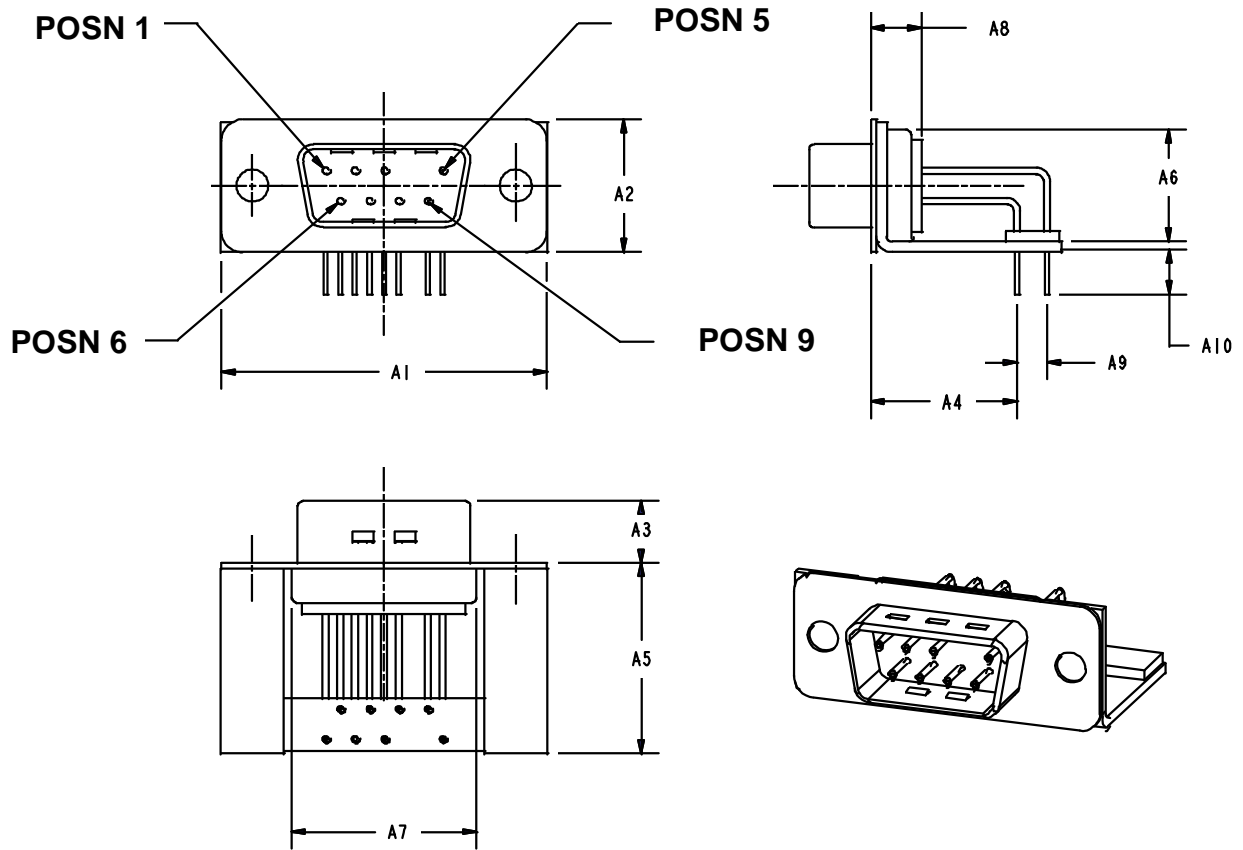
Free board right angle thru hole (version 2) overview and outline dimensions
